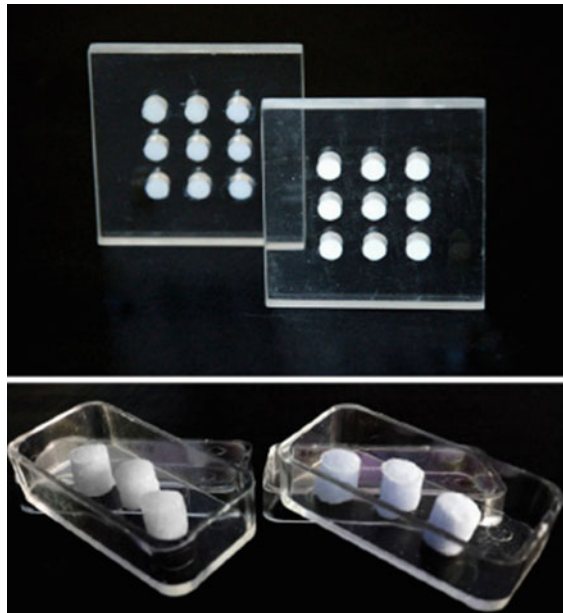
shows such a mold with dimension of  $35.0 \times 35.0 \times 4.0 \text{ mm}^3$ . The mold had nine holes of 6.0 mm diameter, which allowed to have nine cylinders in a single EPD procedure, as shown in Fig. 4.43 [185]. The holes could be in other shapes, such as square, rectangle, or even circles. EPD power was supplied by using a computerized waveform generator controlling a power amplifier. The applied voltage was up to  $\pm 150 \text{ V}$ , with deposition times of 3–15 min. Special dry process was used for different samples. The dried samples were then sintered at different conditions to obtain transparent ceramics.
